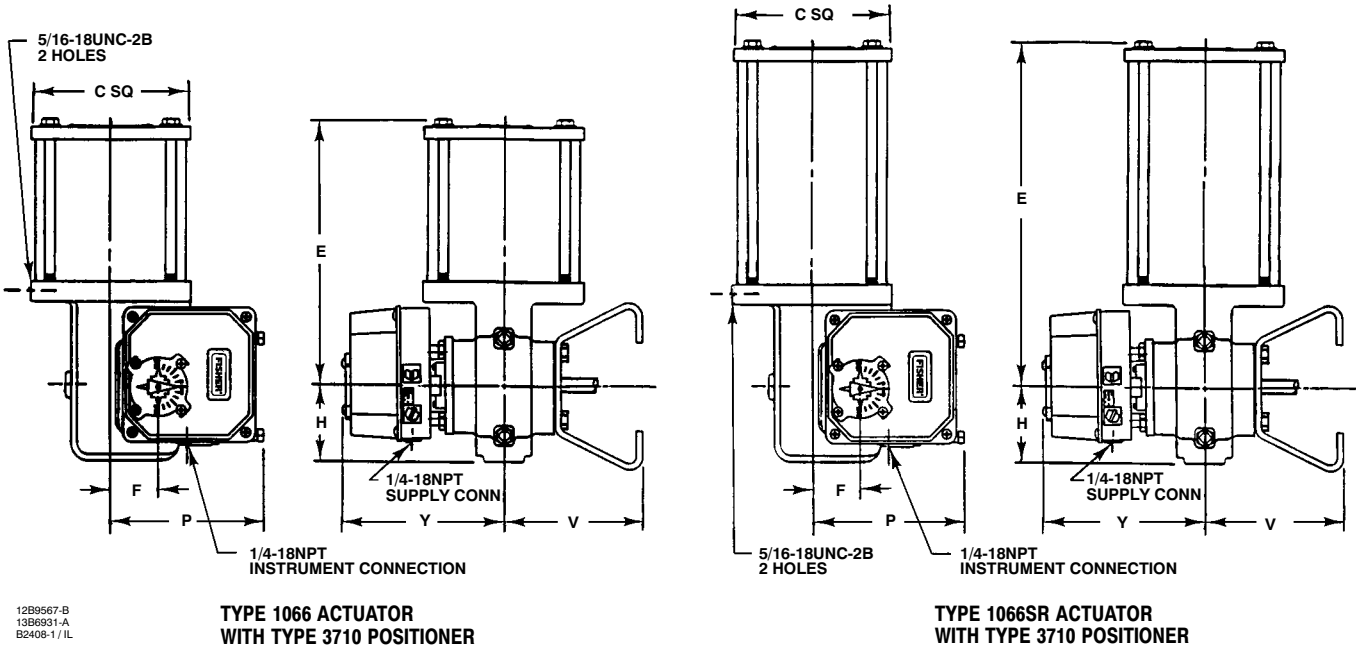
Actuator / Valve Mounting Dimensions (see also table 4)
